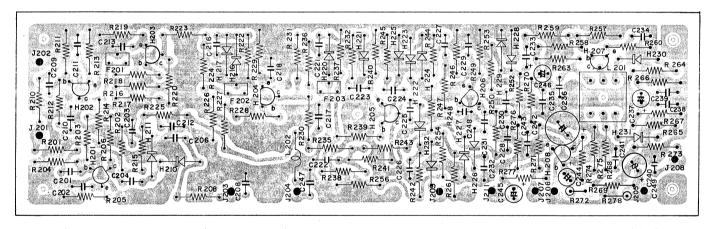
FM IF and Detector Board — P200 Component Assembly Diagram
